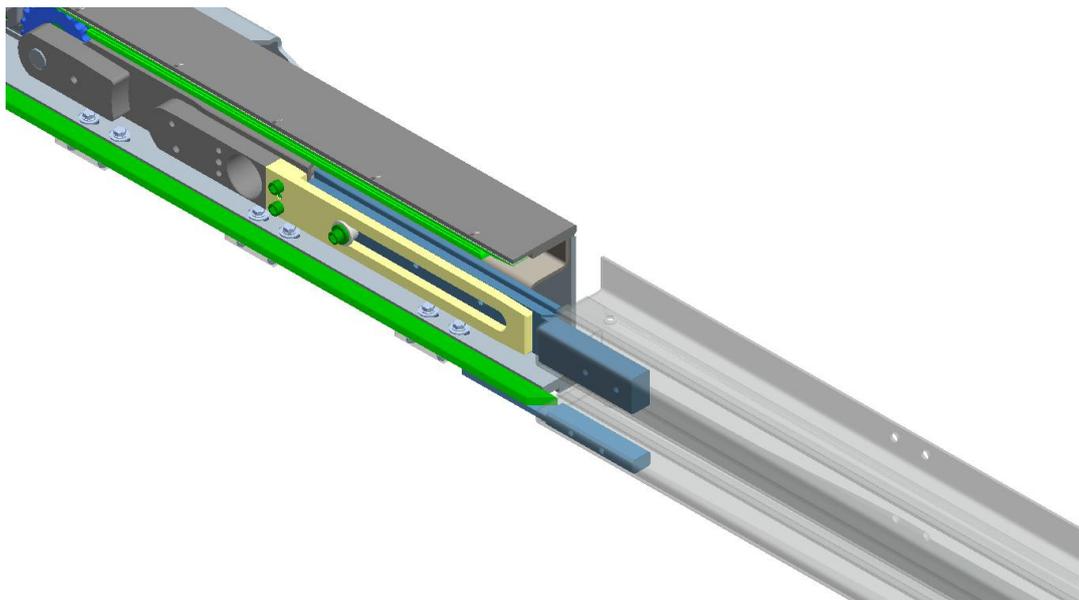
Solution 2, tension head module connection to roll formed steel combitrack
